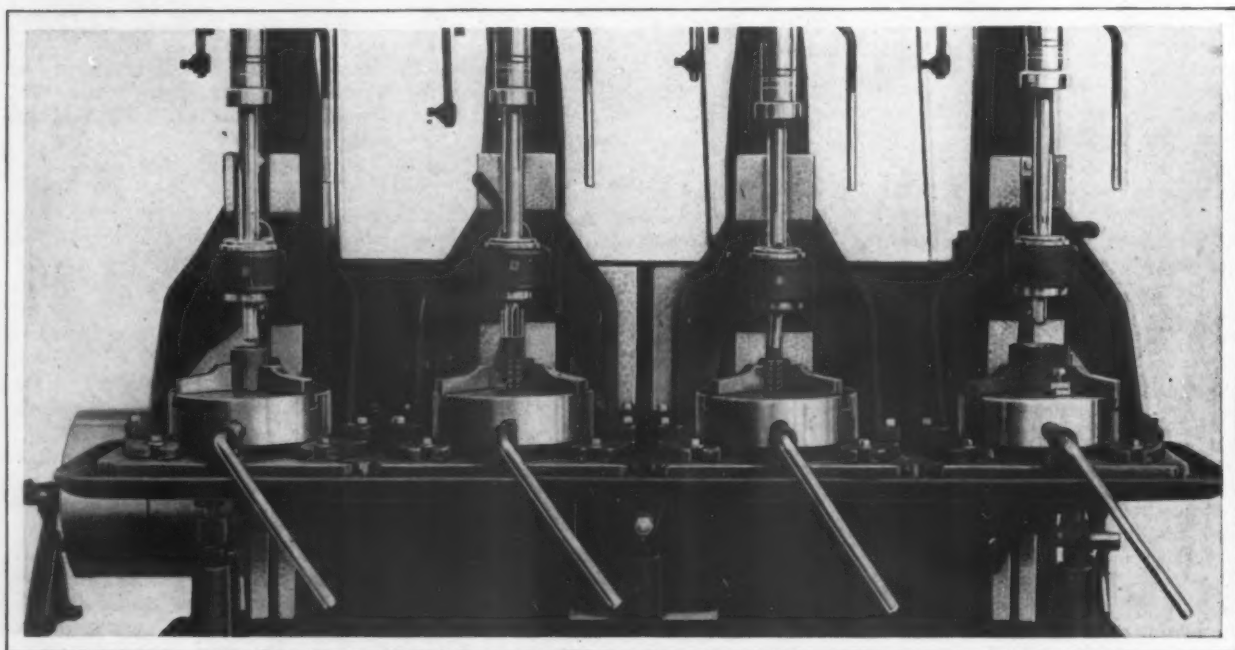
Gang Drilling Machine Equipped for Boring, Facing and Reaming Bushings
